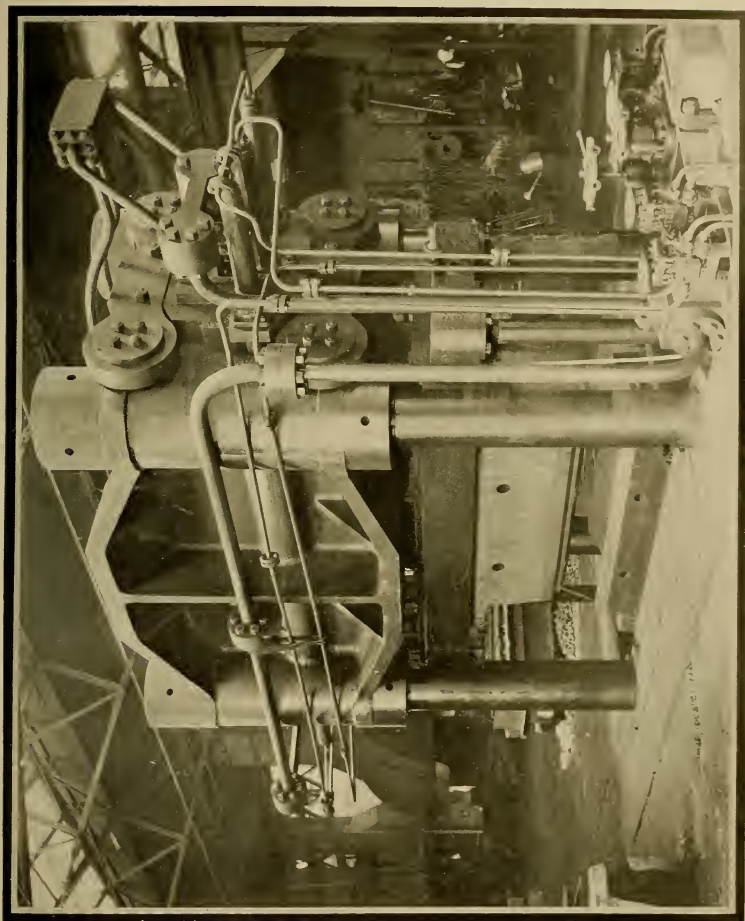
A 3000-TON ARMOUR-PLATE BENDING PRESS BUILT BY MESSRS. TANNETT WALKER & CO., LTD., LEEDS.
